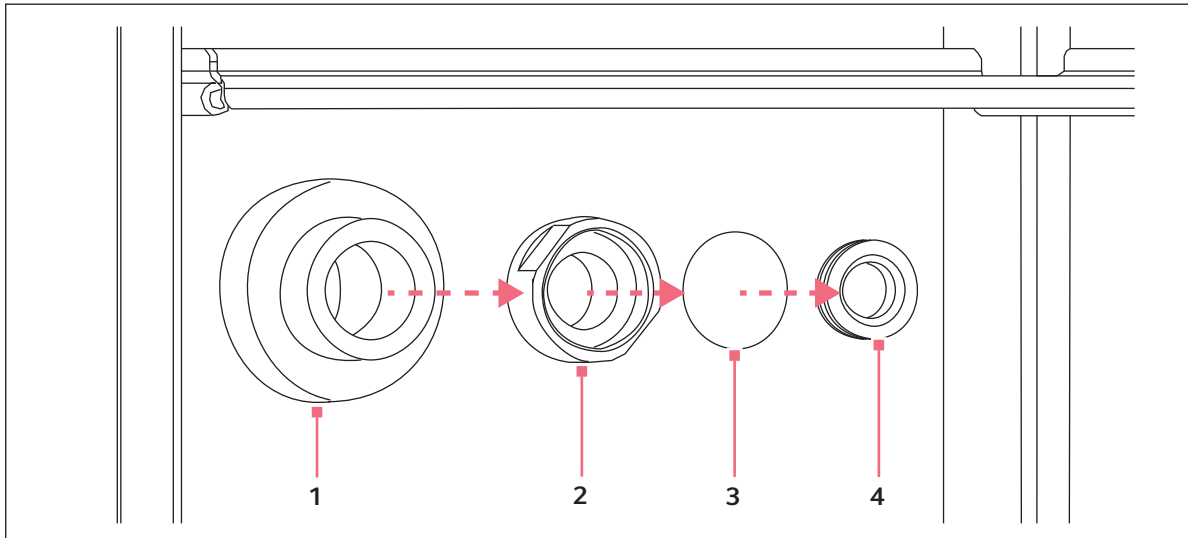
Hydrophobic filter and holder assembly (exploded view)
